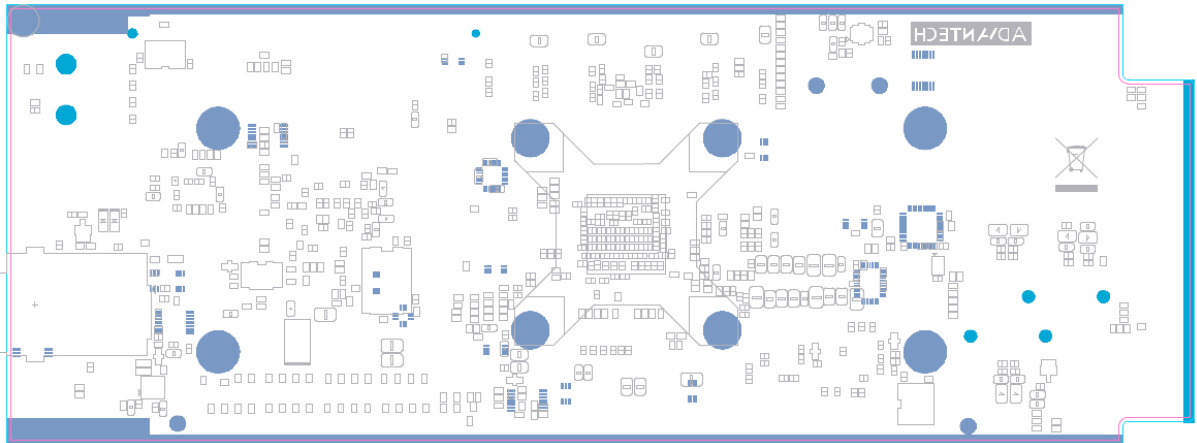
TMDXEVM6614LXE EVM Board layout – Bottom view
